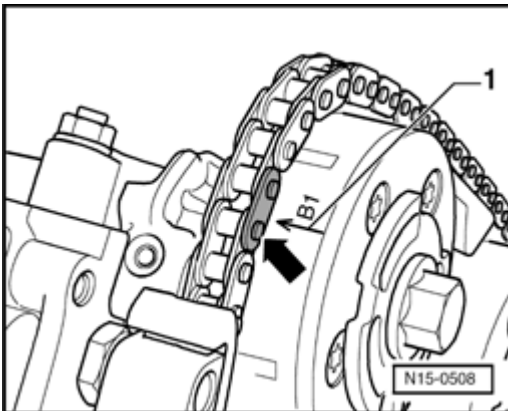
Aligning Copper Link Of The Camshaft Roller Chain
